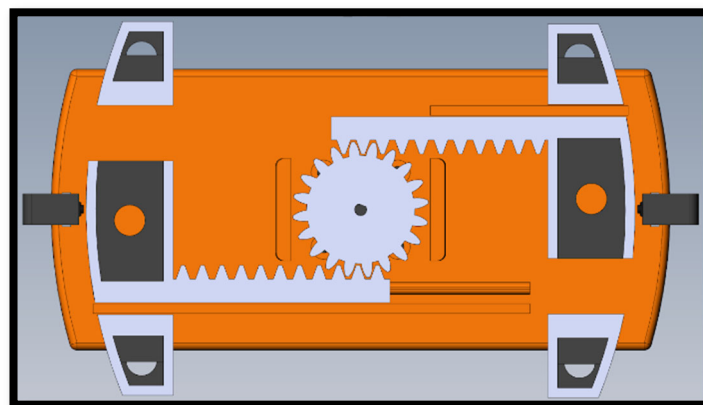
Front cross-section view of rack and pinion system and the rubber stops.
